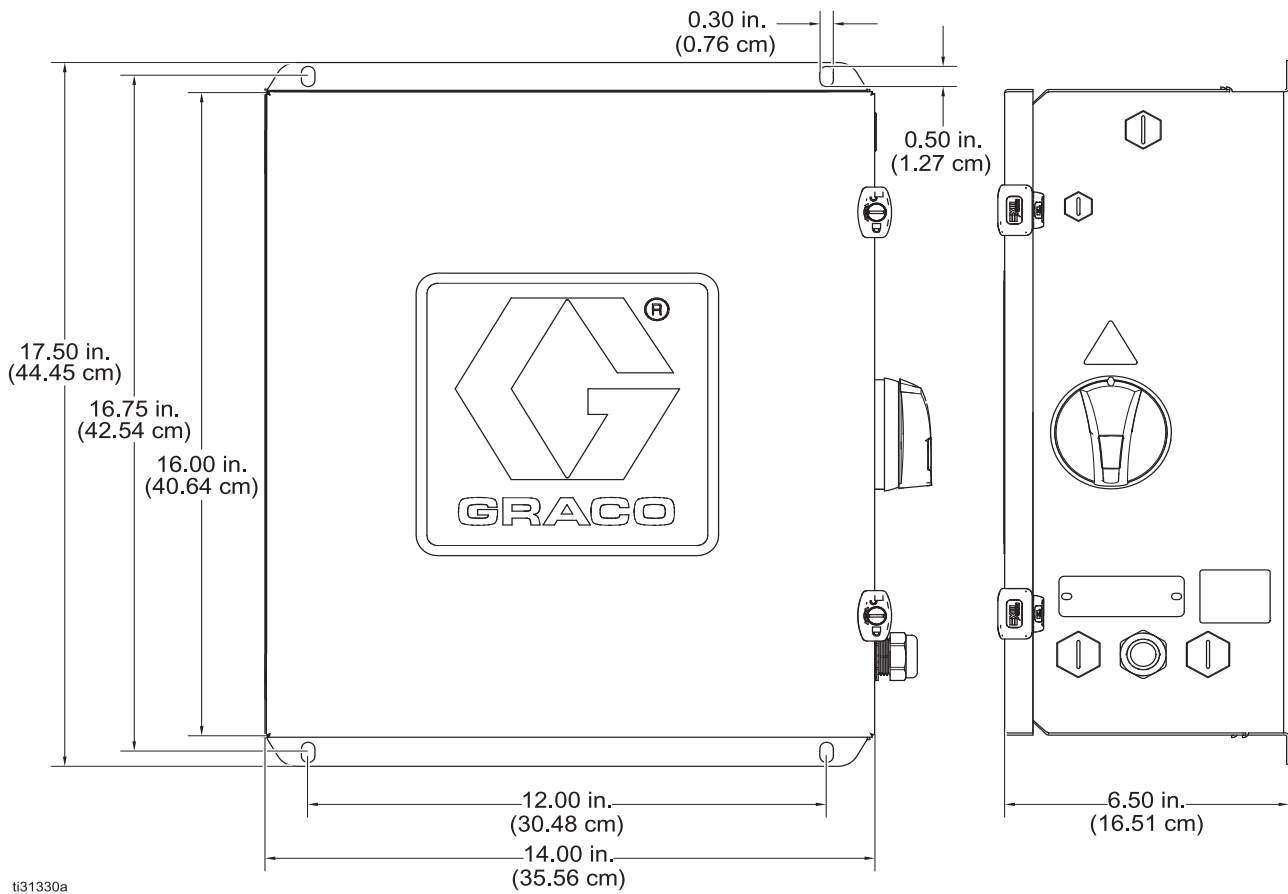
AC Control Box Dimensions and Mounting Hole Locations
